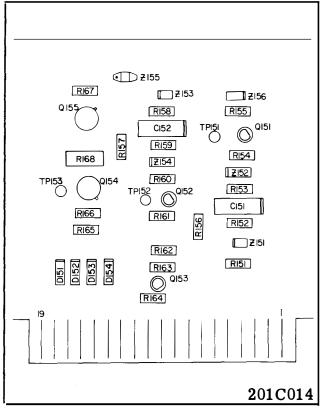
Component Location of the Channel Board for the Type STU Relay.
